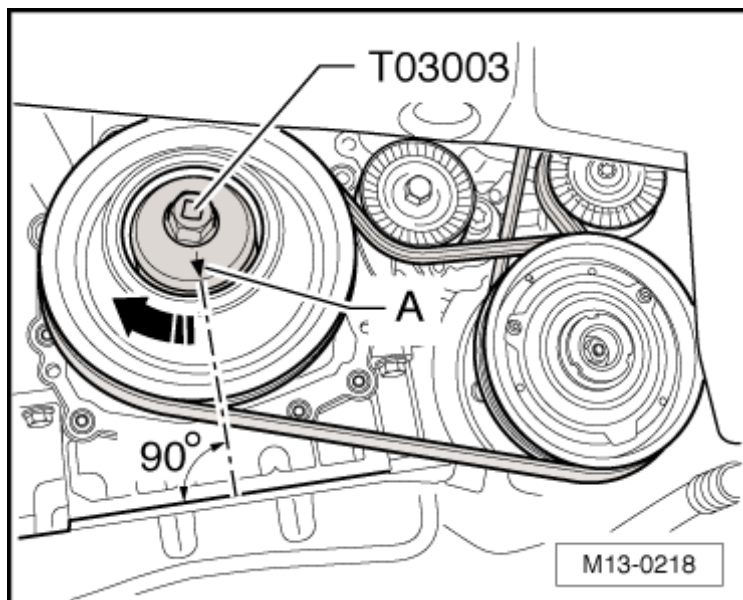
Turning Crankshaft Only In Direction Of Engine Rotation
